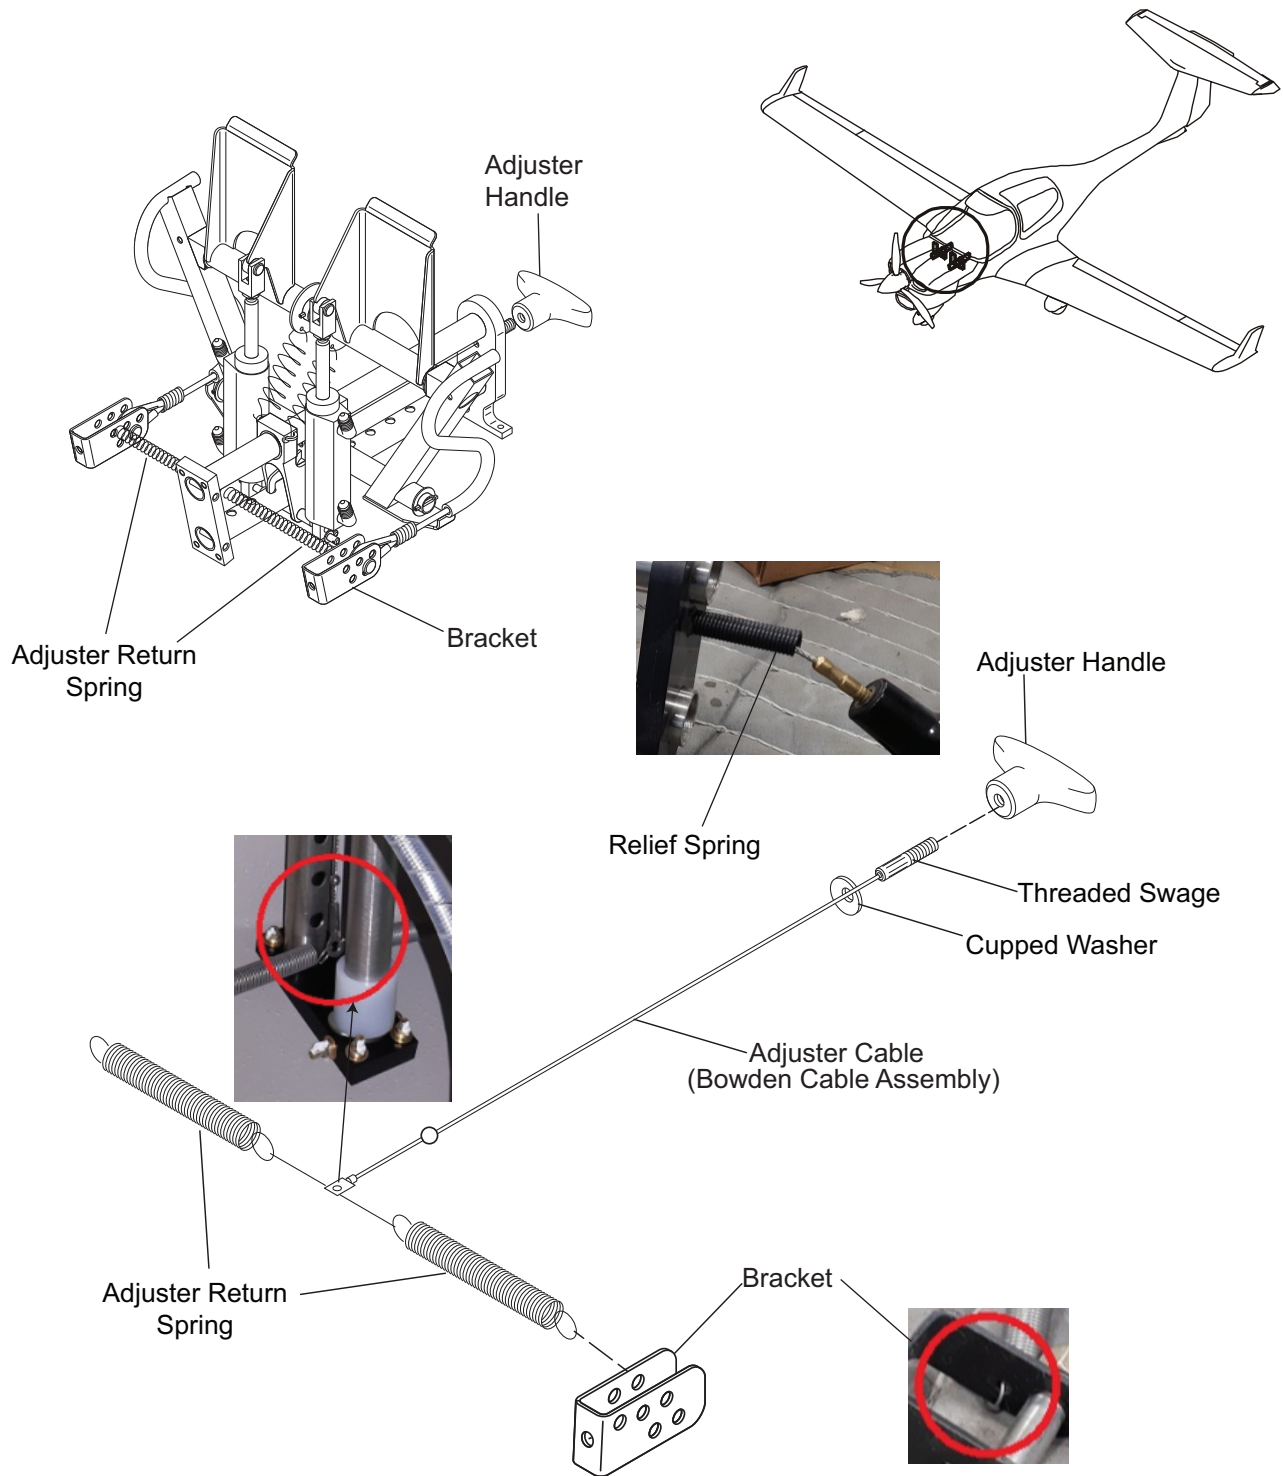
Rudder Pedal Adjustment-Cable - Replacement
